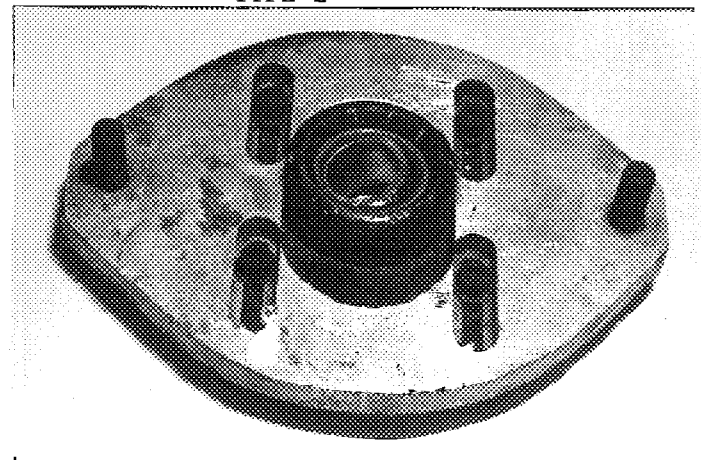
REINFORCED STRUT TOP MOUNT TYPE 2
